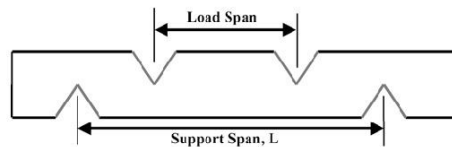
Fixture Used to Align Loading Noses and Supports
